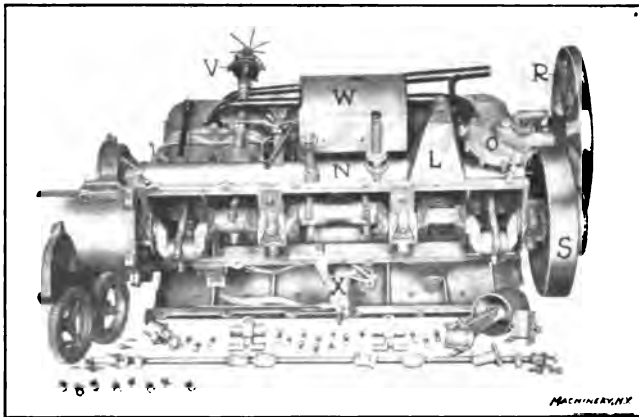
View of Engine from Beneath, showing Removal of Piston, Cam- and Lay-shafts, etc., without Dismantling
